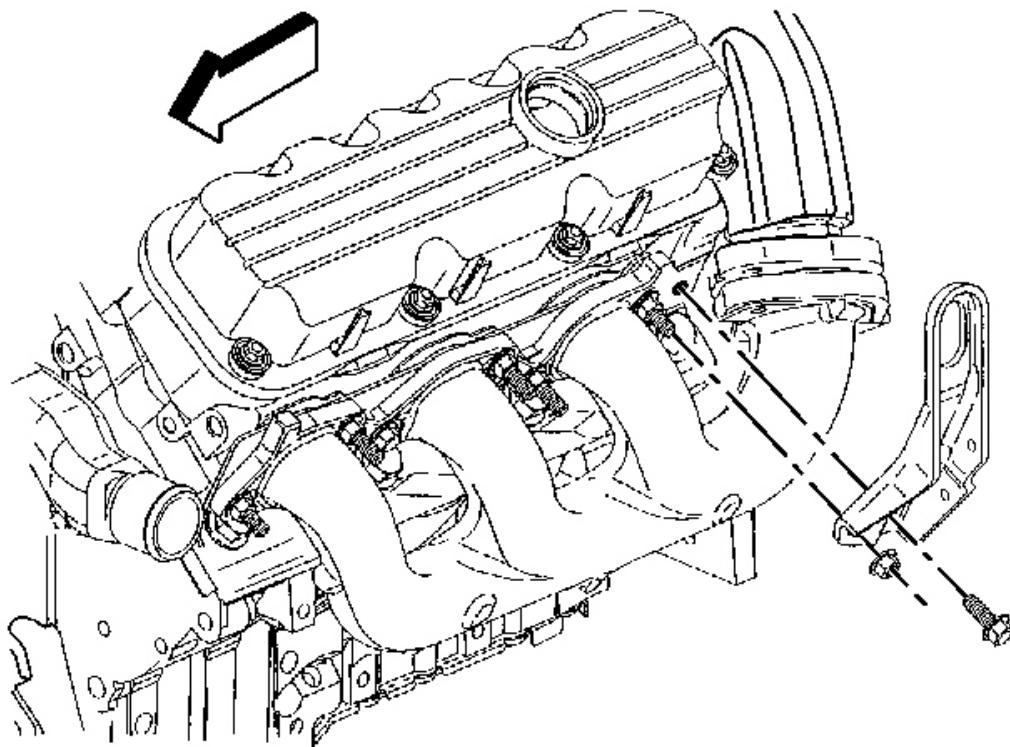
Removing/Installing Left Exhaust Manifold
